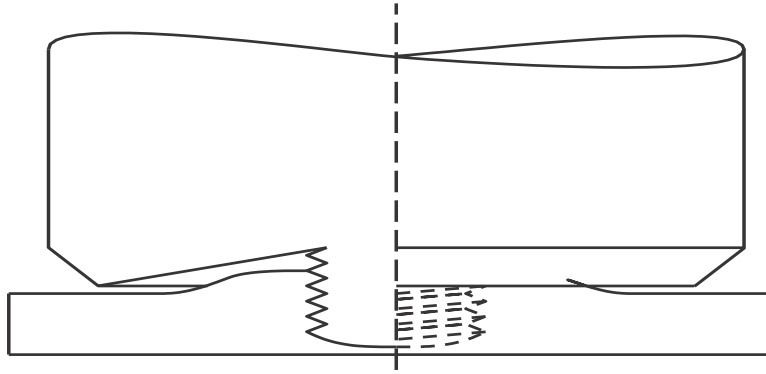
Side view of the FSW tool showing the conical shoulder cap and threaded probe.
